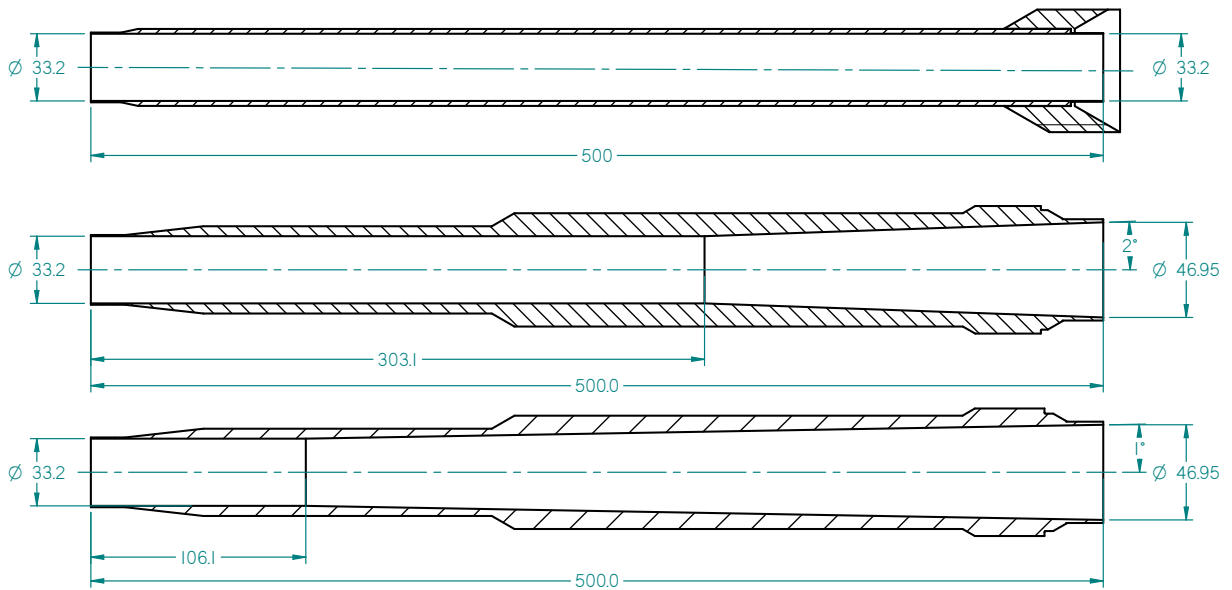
Manufacturing drawing of the three combustors. (Dimensions in mm.)
